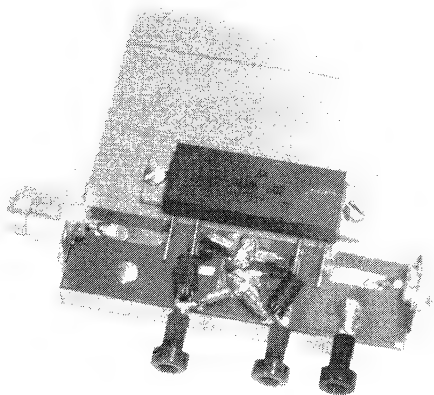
UHF POWER MODULE TEST FIXTURE
